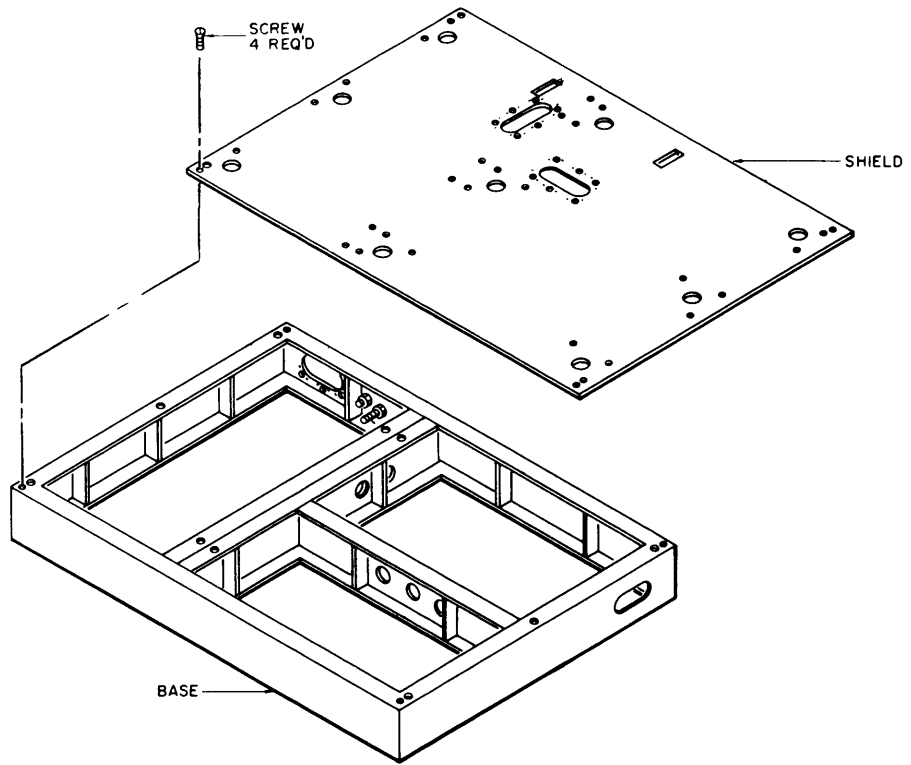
Base Assembly for the First and Second Frames, Installation Diagram.
